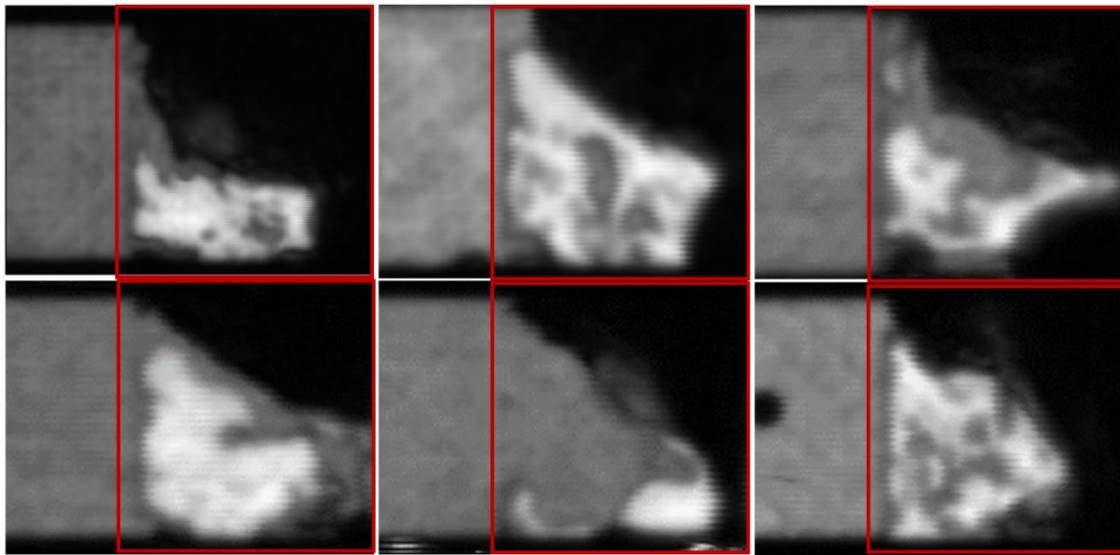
NDE of ultrasonically welded LM-PAEK reveals partial bonding (6 specimens, loading direction is horizontal).
